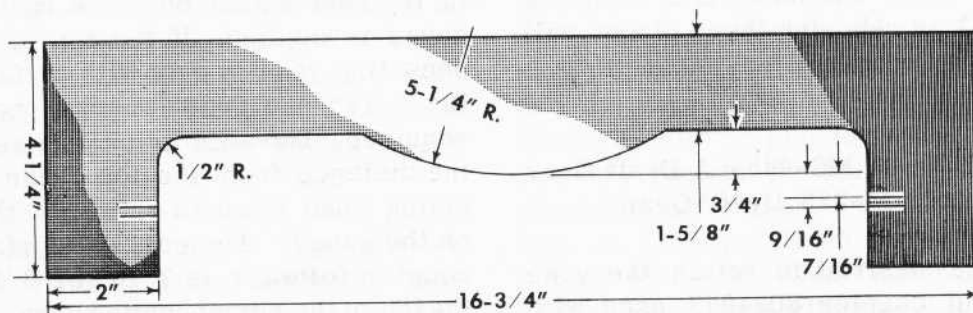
Shim Thickness Gauge Used With Draft Gear MF-275-1
